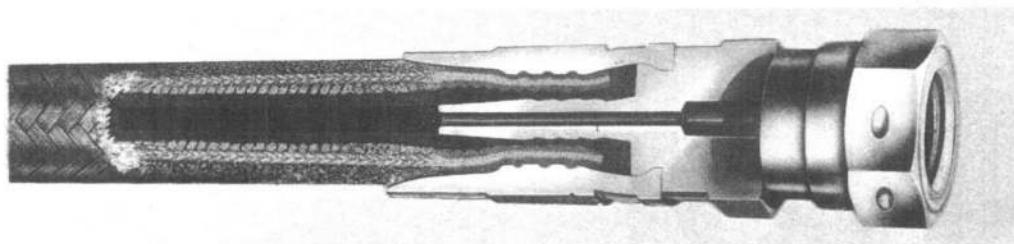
Lockheed A.D.S.262 hose and straight end fitting
